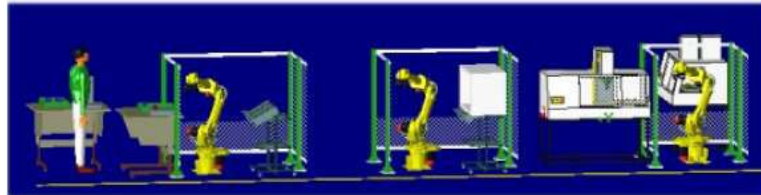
The RFT Virtual Factory - from right to left, the machining cell, the inspection cell and the assembly cell
